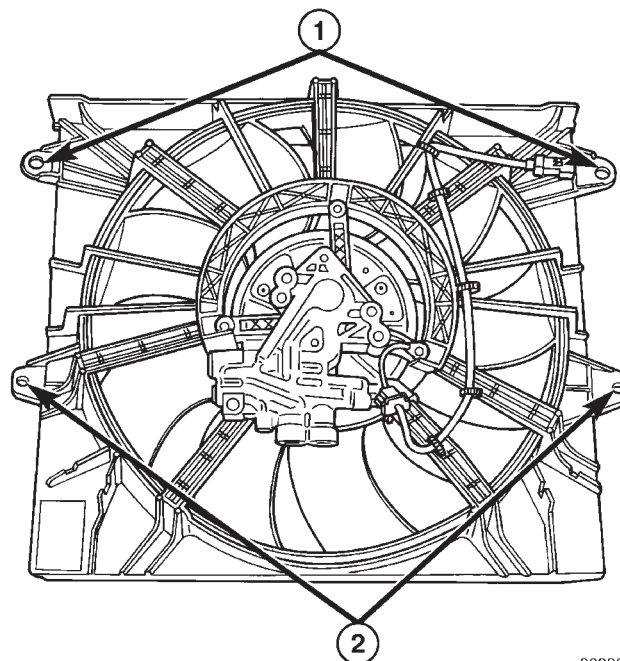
FAN SHROUD MOUNTING BOLT LOCATIONS
